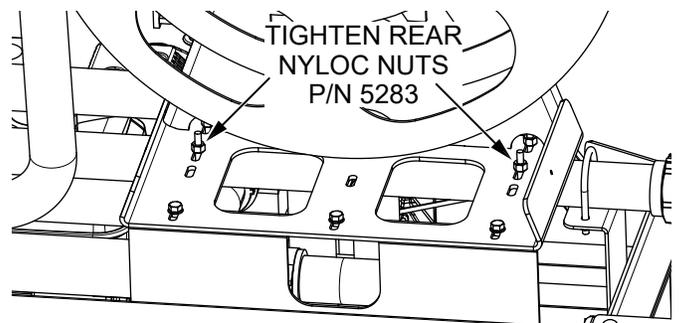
Install Three 5/16-18 × 3/4 Hex Head Flange Screws
